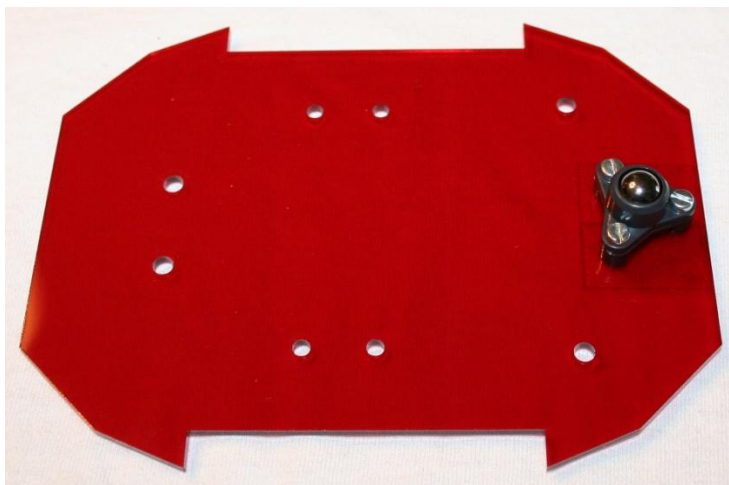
Assemble Rear Caster Wheel to Base Plate.
